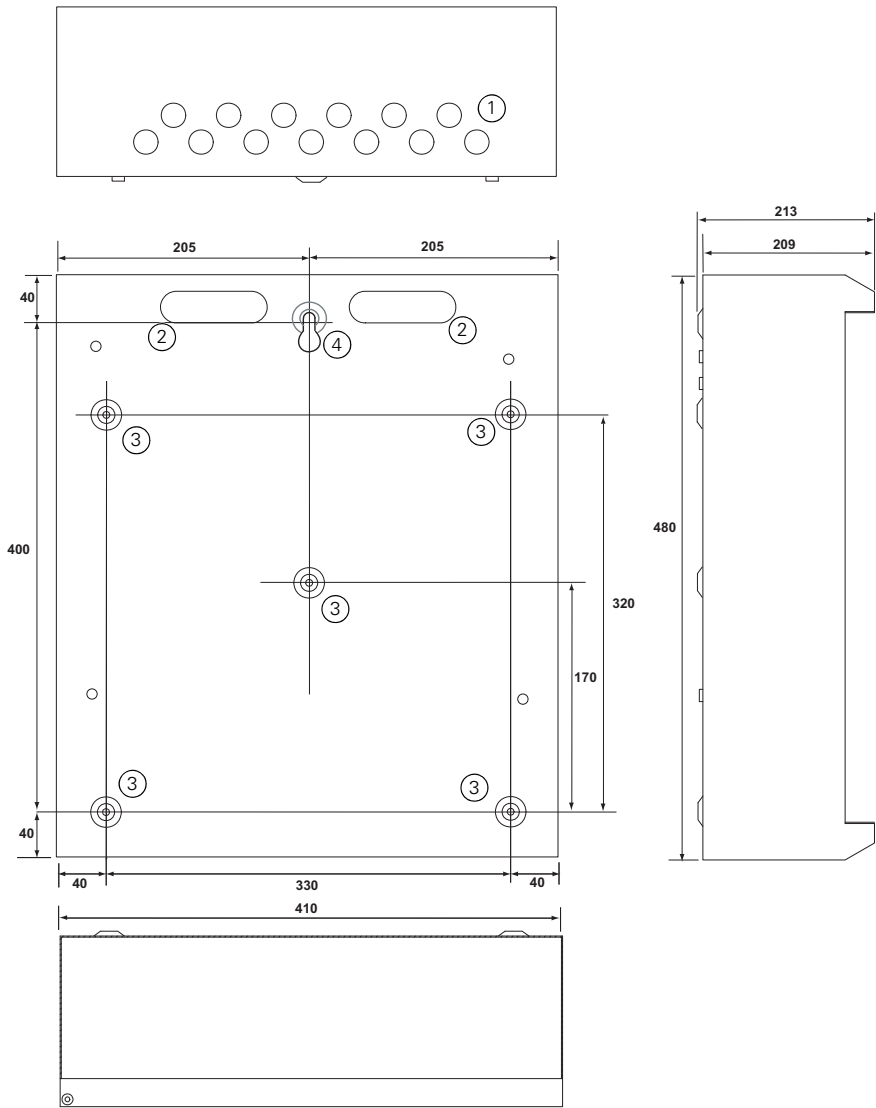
Housing Overall and Fixing Dimensions - PSU A38
